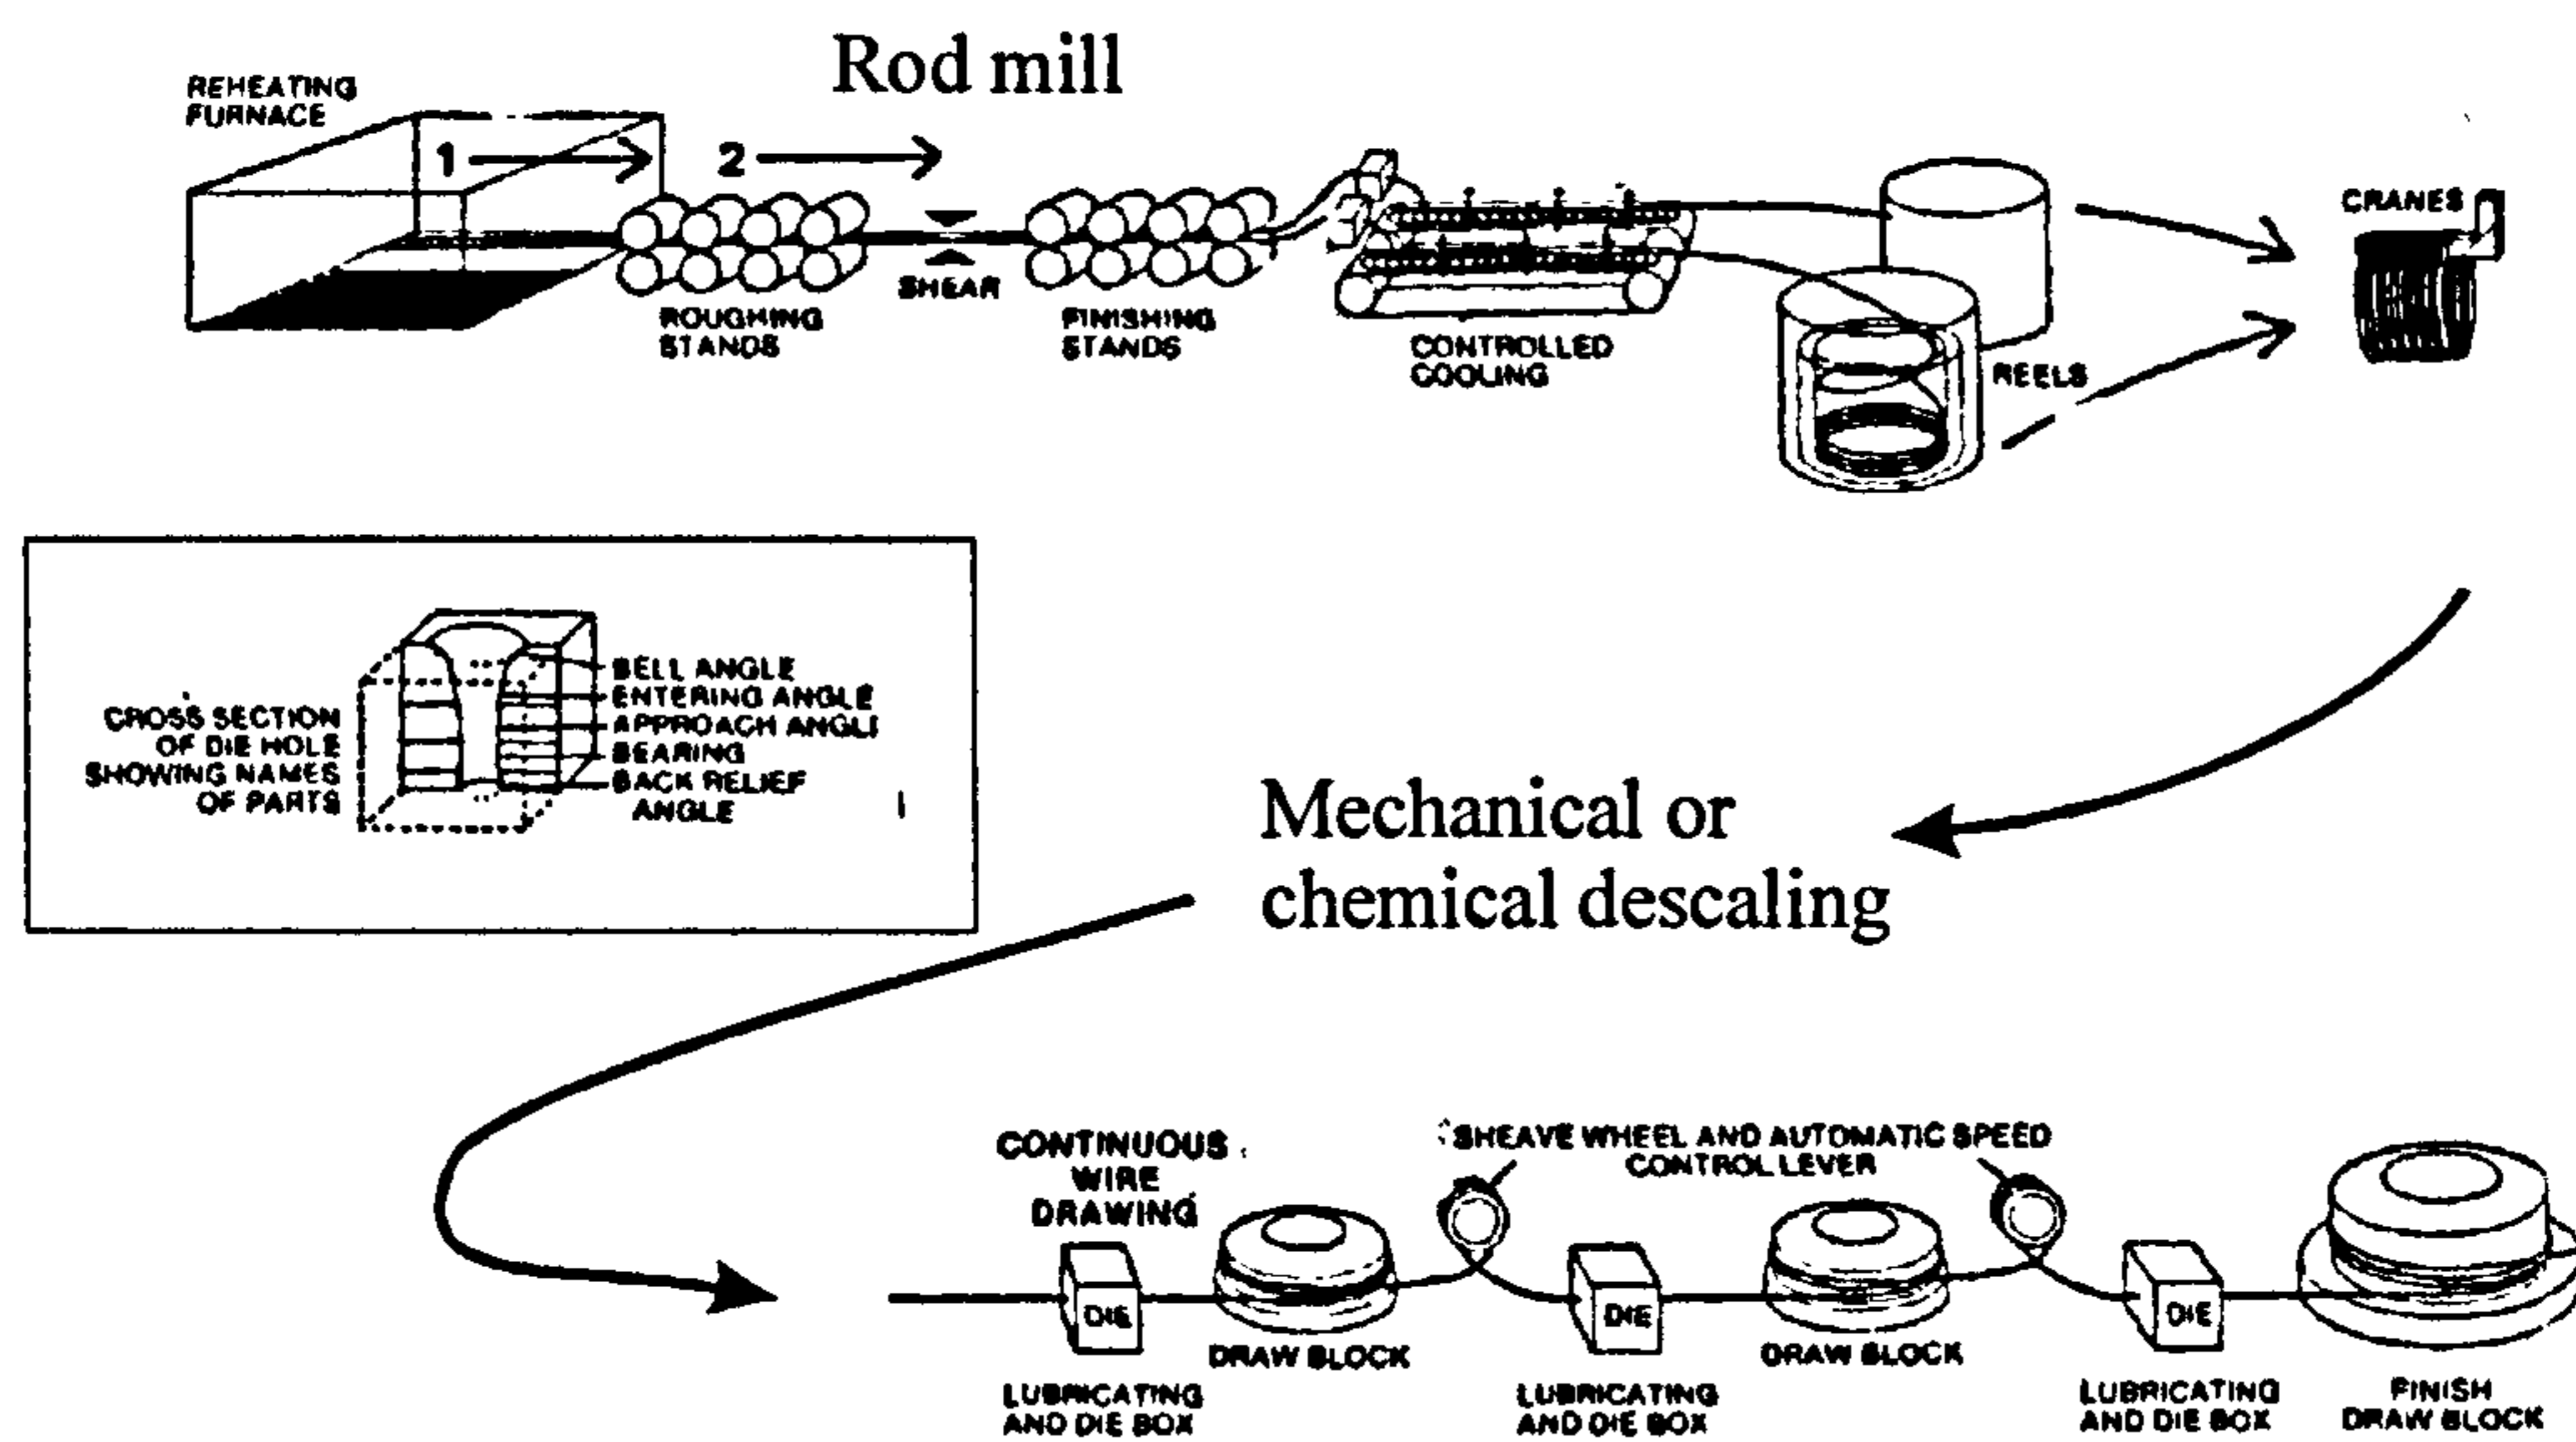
The rod rolling and multiple stage wire drawing processes- schematic (from [30])
